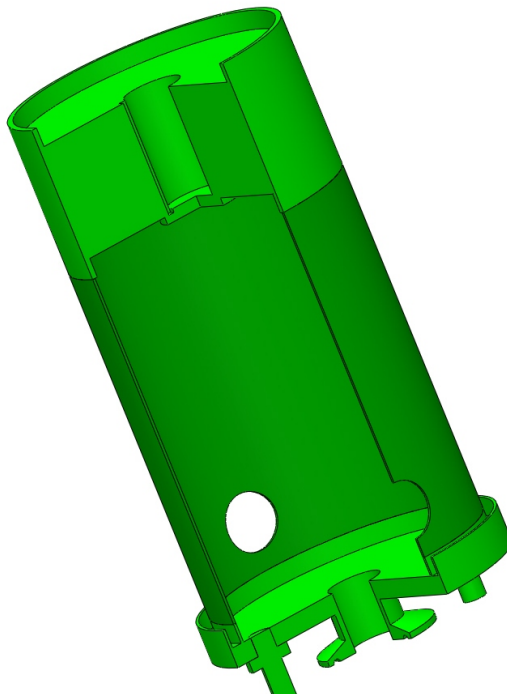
The Torque Transfer Element integrated in the cryostat. - The TTE is shown with one quarter cut away to increase visibility. It is welded to the bottom of the LN_2 chamber of the cryostat which accommodates the torque locking shaft socket the HTS field winding is lowered into. The vacuum valve is placed at the bottom of the TTE as an evacuation access point.
